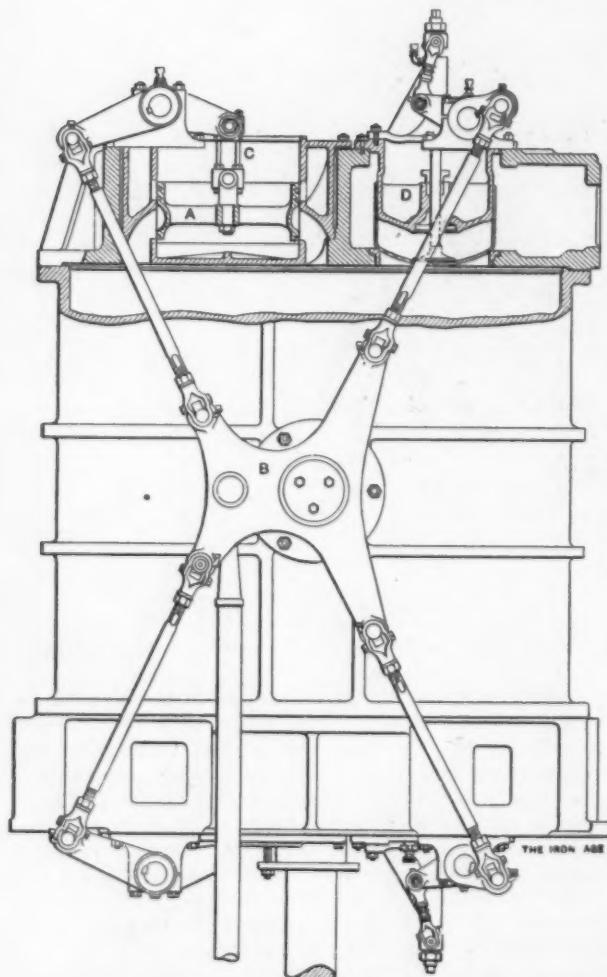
Detail of the Air Cylinder, Showing the Operation of the Valves.
